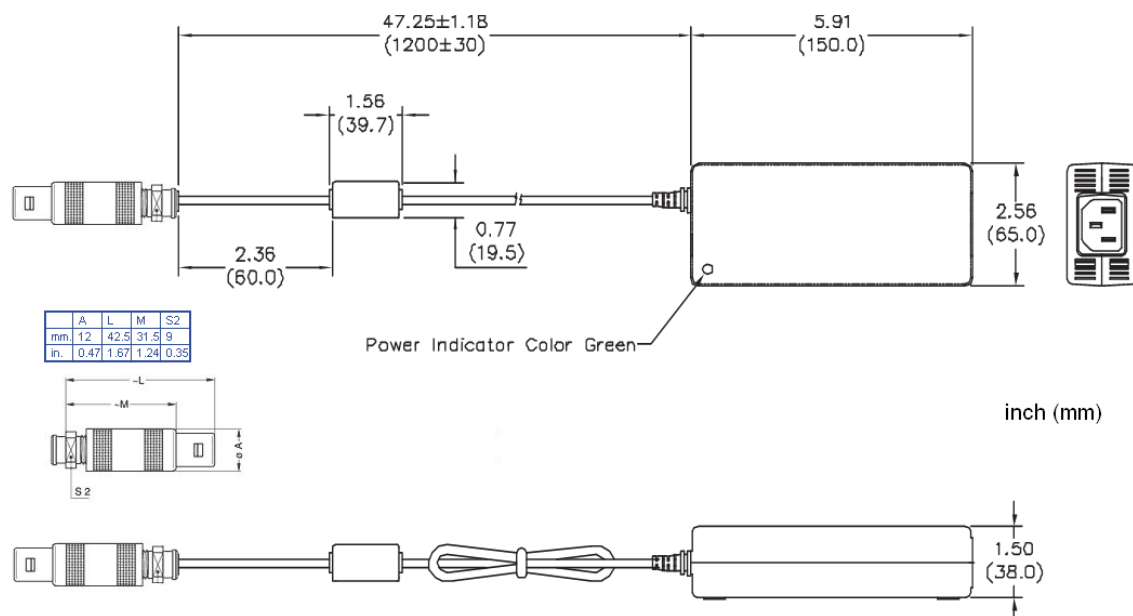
PSU mechanical drawing model PSG150-24-01
